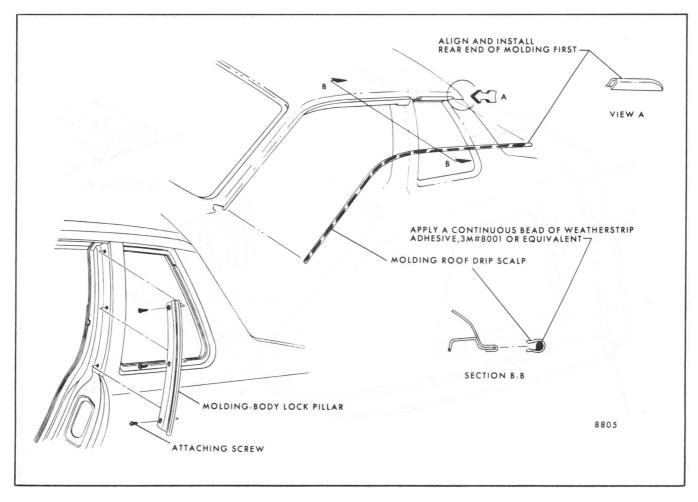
Body Lock Pillar Molding "H-27" Shown, "X-27" Similar
